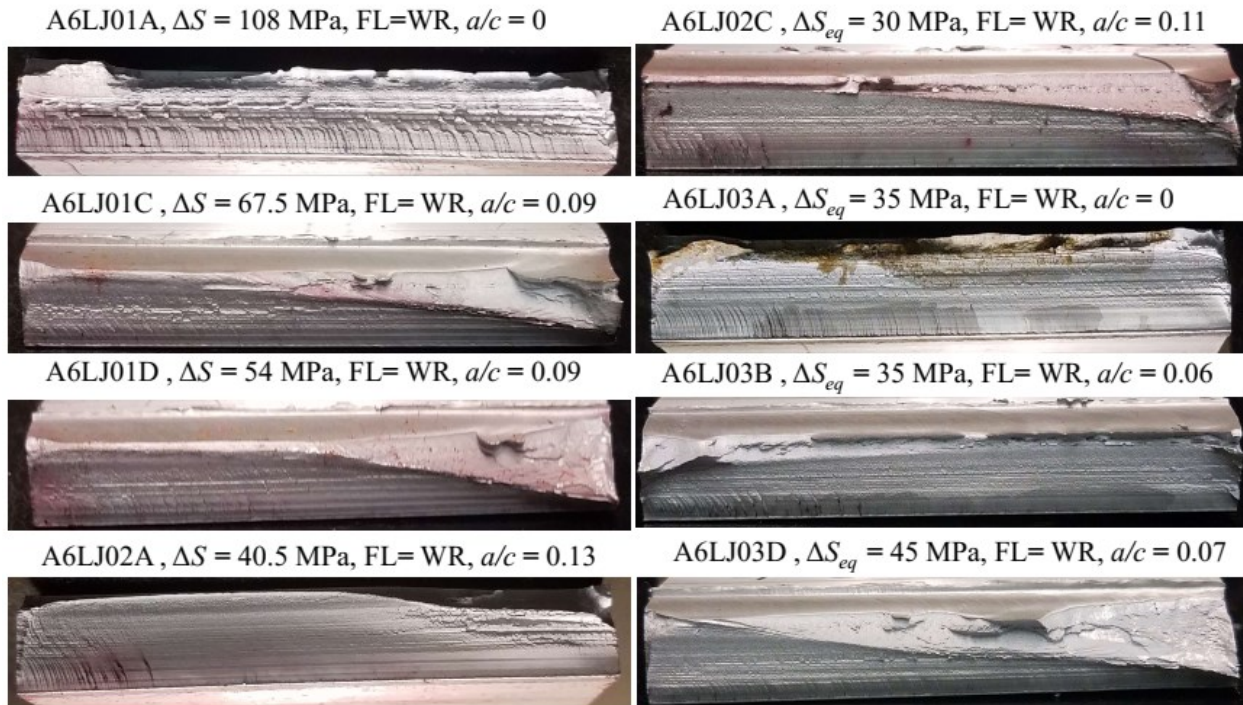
Fracture surfaces of lap joint specimens
